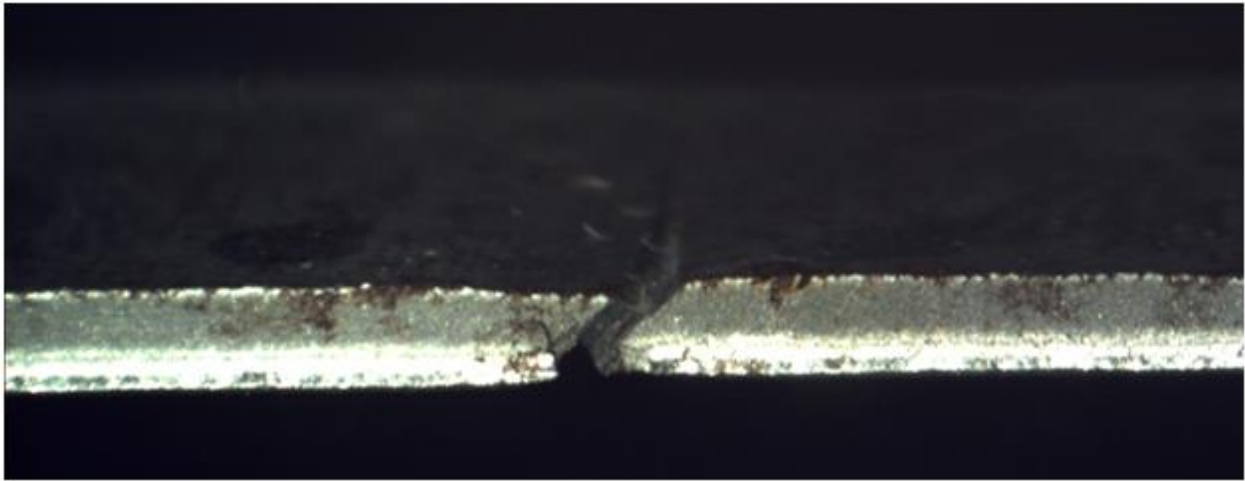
Typical edge crack phenomenon of steel sheet from Supplier 1, DP980 0.96
